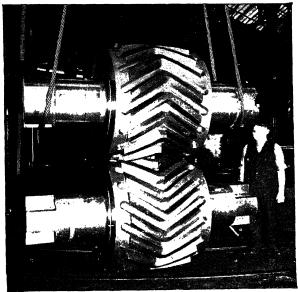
Forty-eight-inch pinion gear—a good example of high-accuracy machine work. These gears will probably drive a rolling mill. (Bethlehem Steel Co.)
